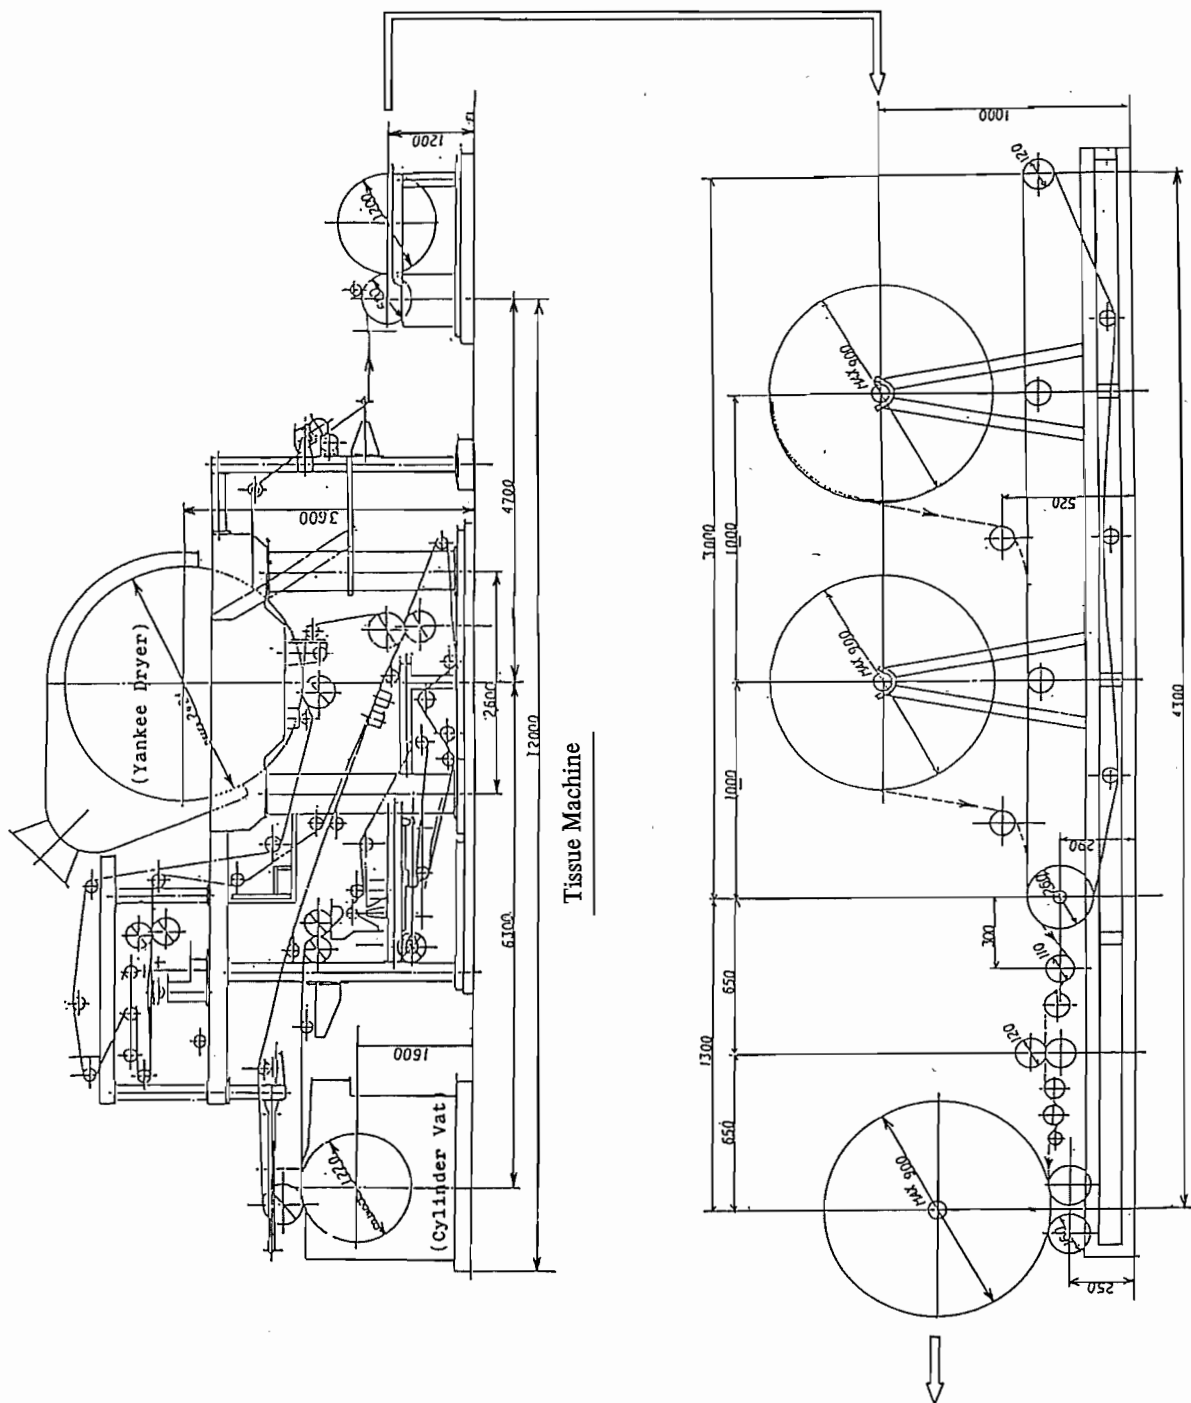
Rough Sketch of a Tissue Machine and a Ply and Slitter Machine
